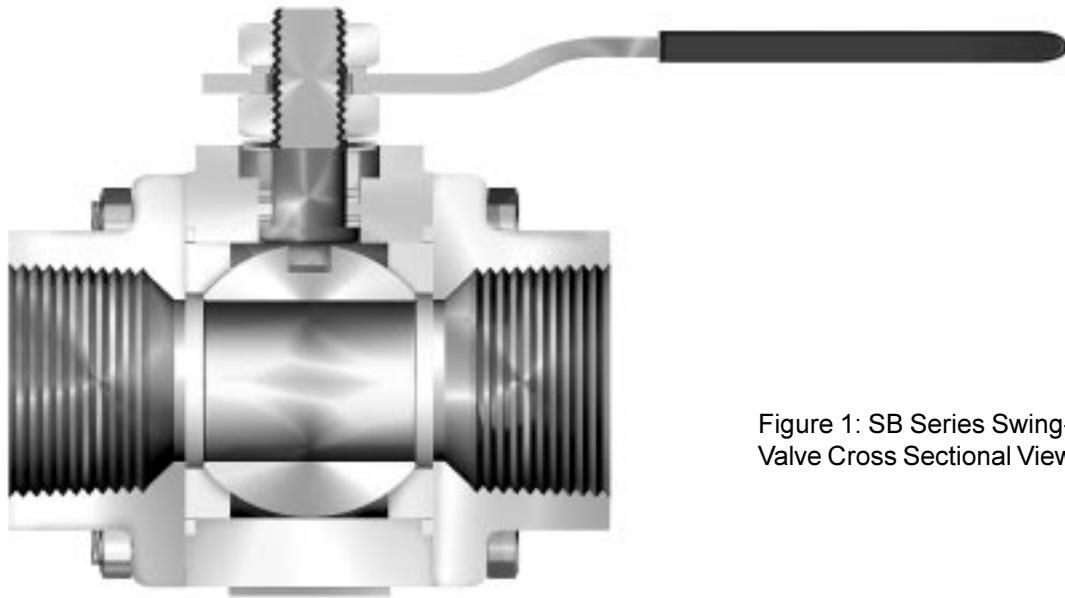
SB Series Swing-Out Ball Valve Cross Sectional View
